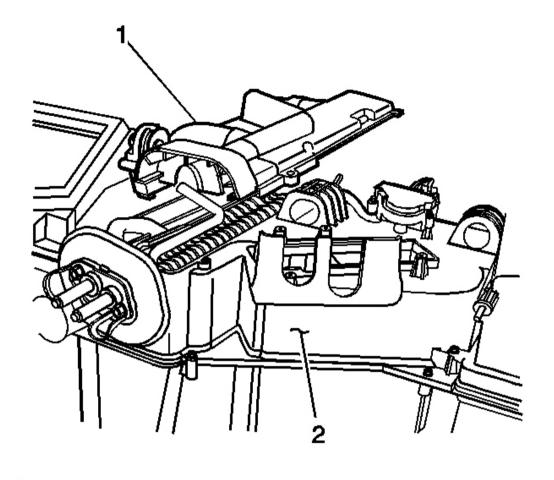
Evaporator Cover & HVAC Module Courtesy of GENERAL MOTORS CORP.
